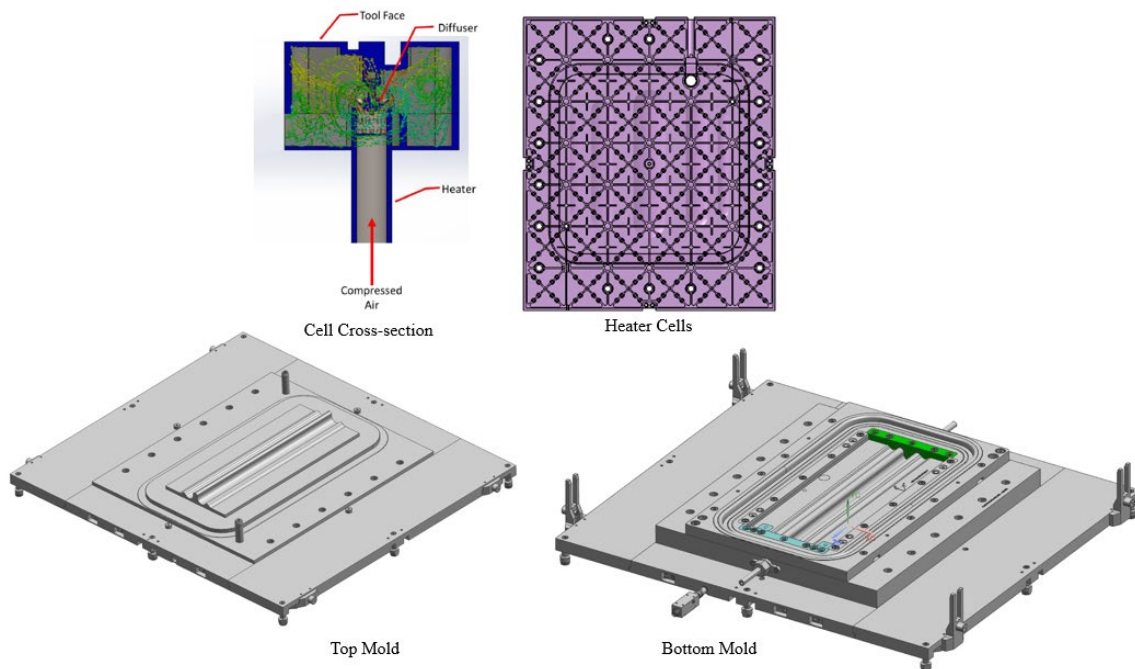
CMD-TS-RAPM-012-501 Mold Configuration
